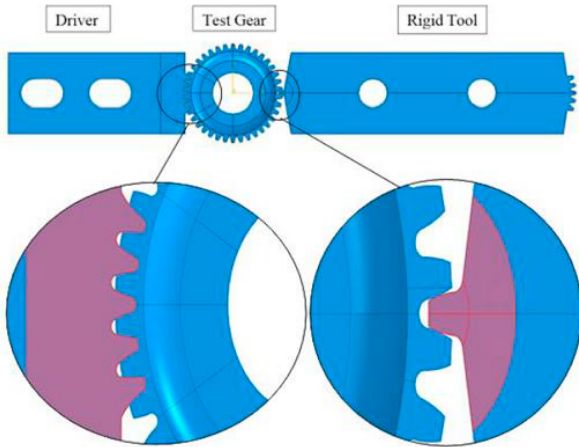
Assembly of the “complete” model. Driver and tools are modelled as rigid parts.
